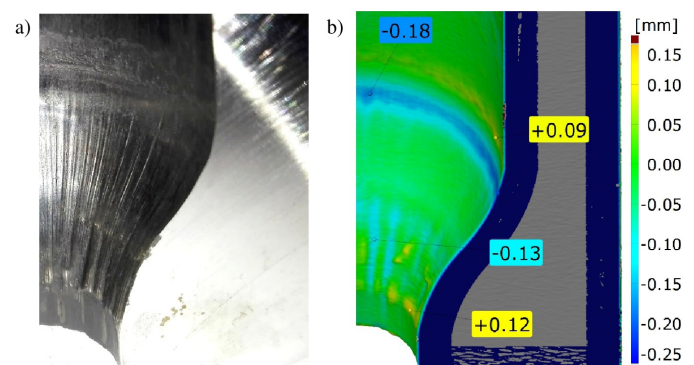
The tool surface after 900 working cycles: a) macro view, b) comparison of laser scan image with CAD model
